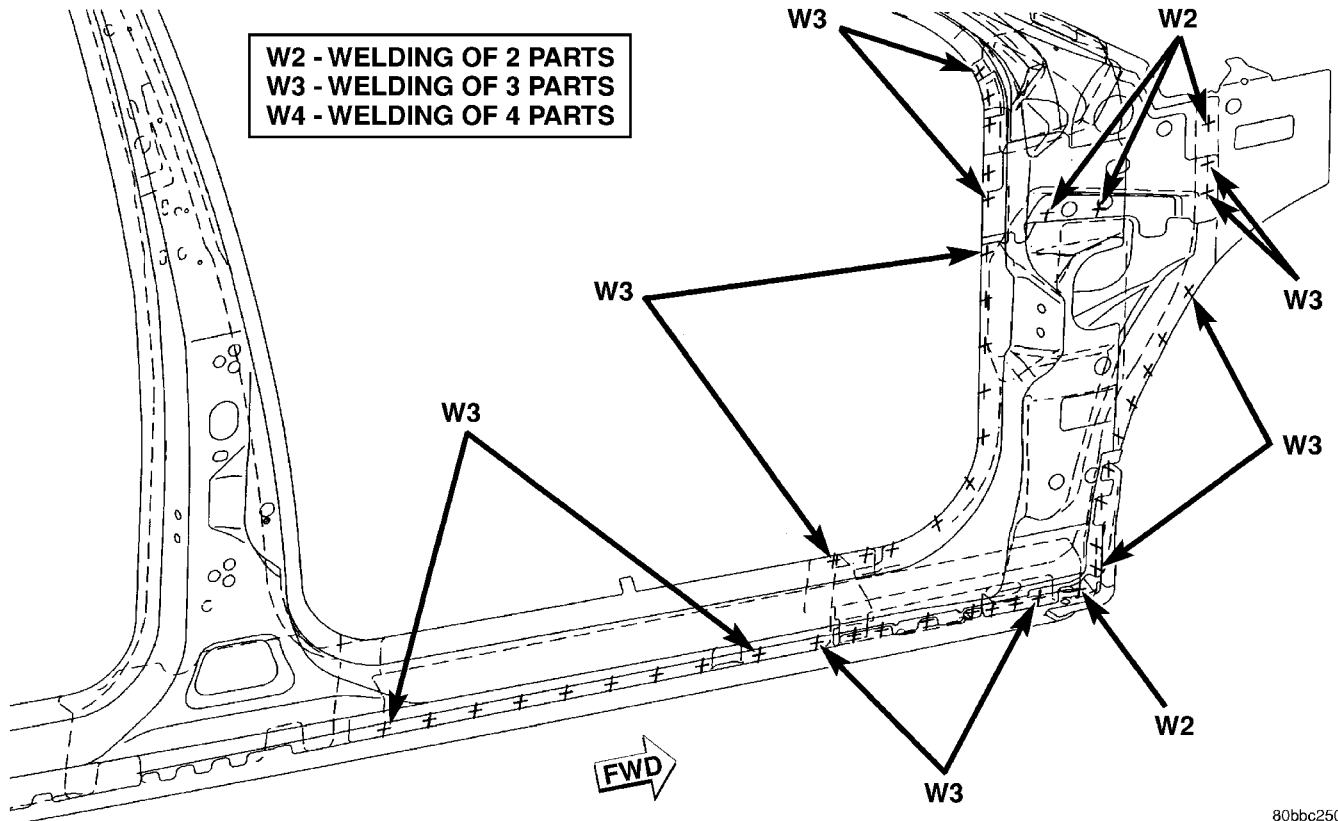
OUTER BODY SIDE APERTURE TO SILL AND COWL SIDE PANEL
